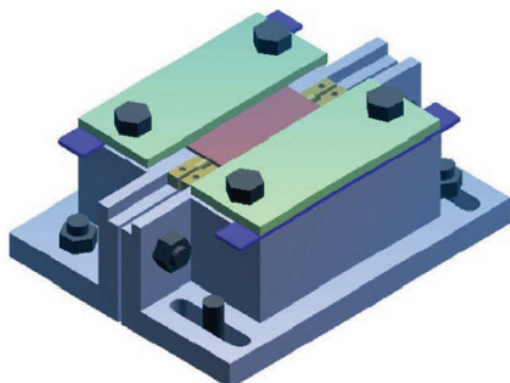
3D model of clamping tool used in FSW of T-joints [10]
